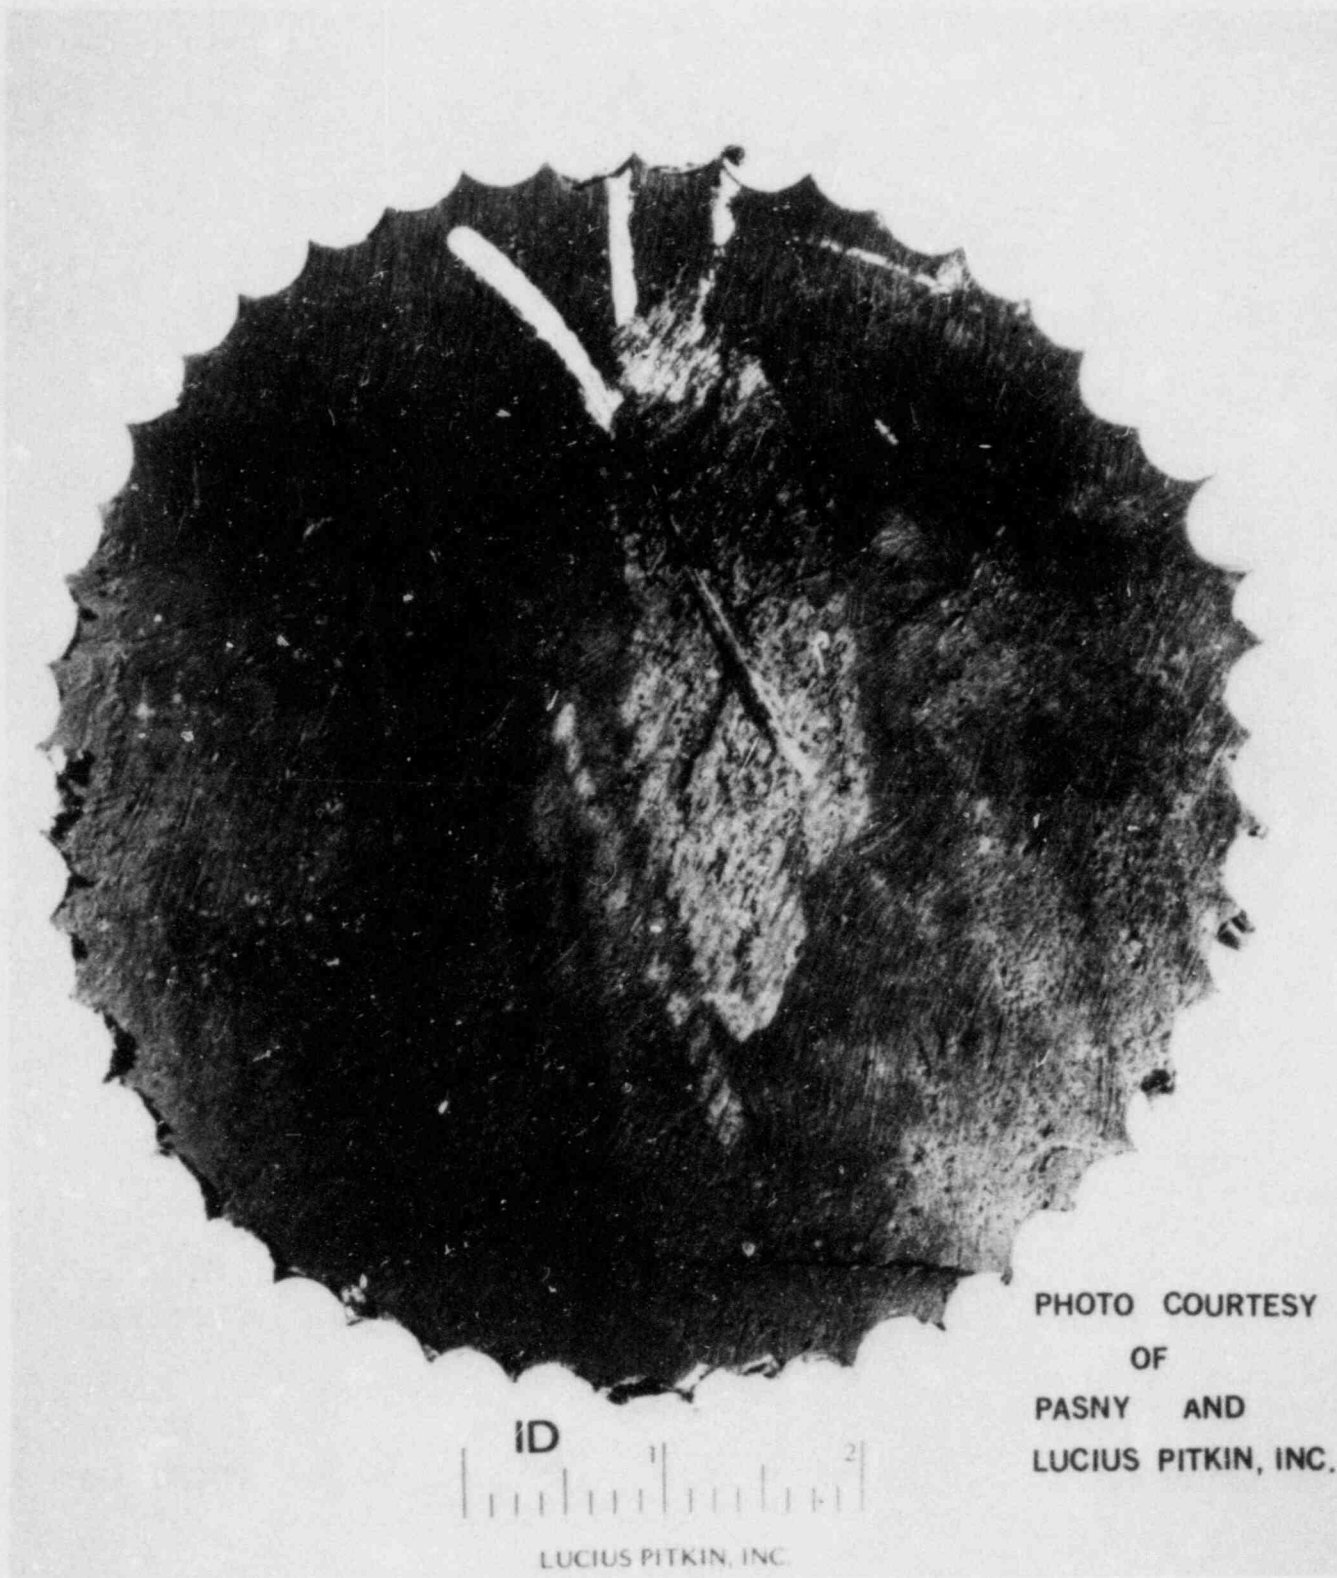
Photograph of the inside surface of steam generator #32 showing cracks and evidence of pitting.
